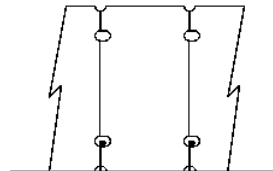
Block assembly methods 2c and 2d [2], [30]
